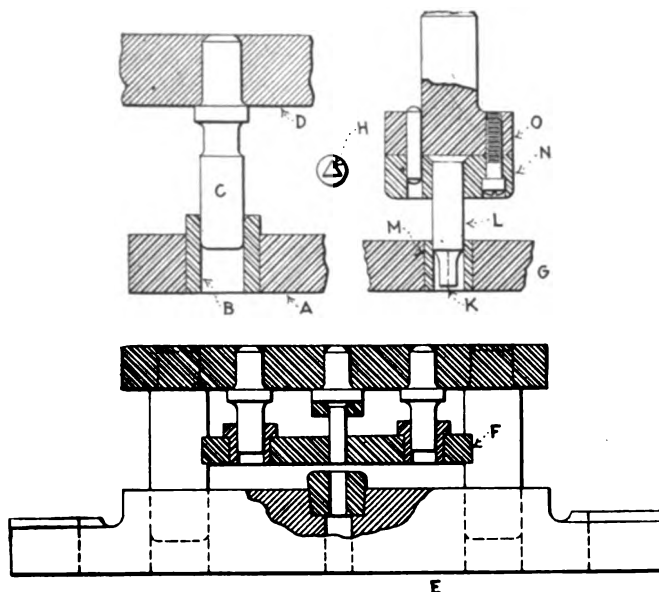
STRIPPERS, STRIPPER GUIDE PINS AND PUNCH FOR HOLE NOT ROUND
